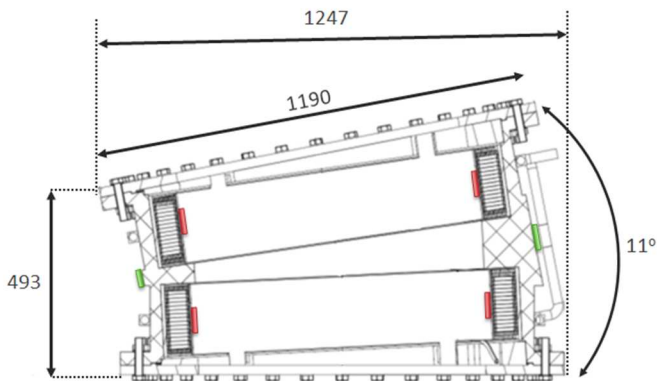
Cross section of the TS prototype module highlighting the location of the spot heaters on the coils (red) and on the housing shell (green). Dimensions are in mm.
